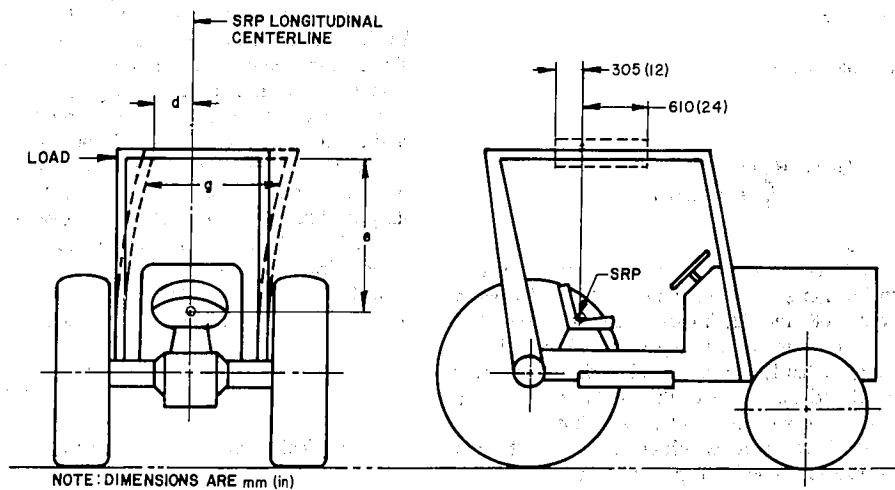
TYPICAL SIDE LOAD APPLICATION
